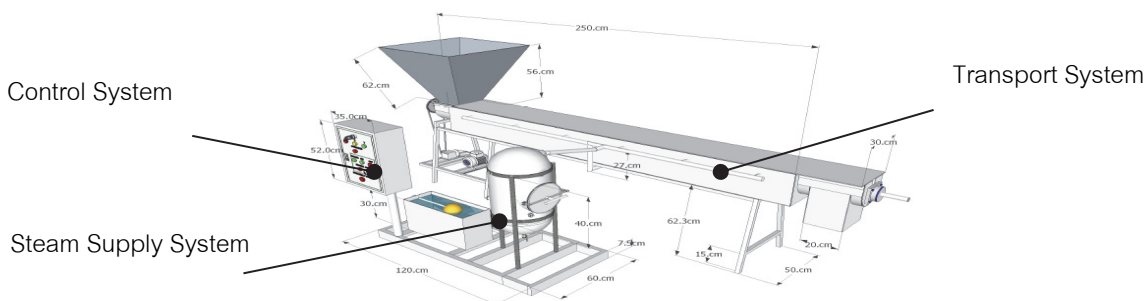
Design and test of the aging-induce rice machinery for community rice mill.
